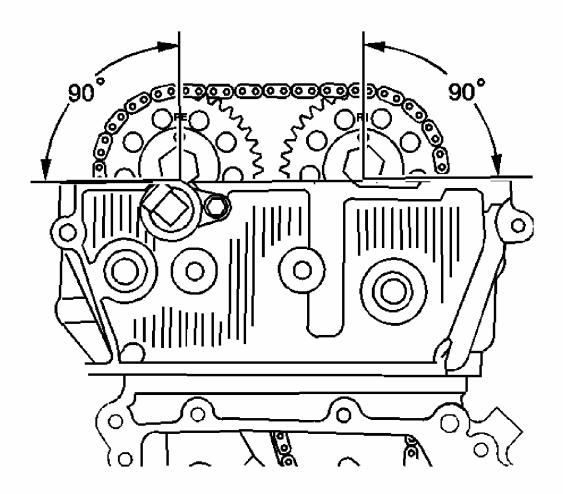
Ensuring Camshaft Sprocket Drive Pins Are At Top Of Their Rotation Courtesy of GENERAL MOTORS CORP.
